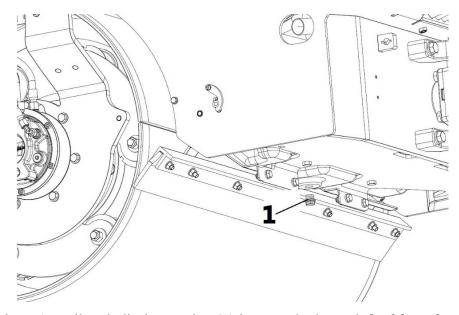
Oil tank discharge plug (1) is set at the lower left of front frame
